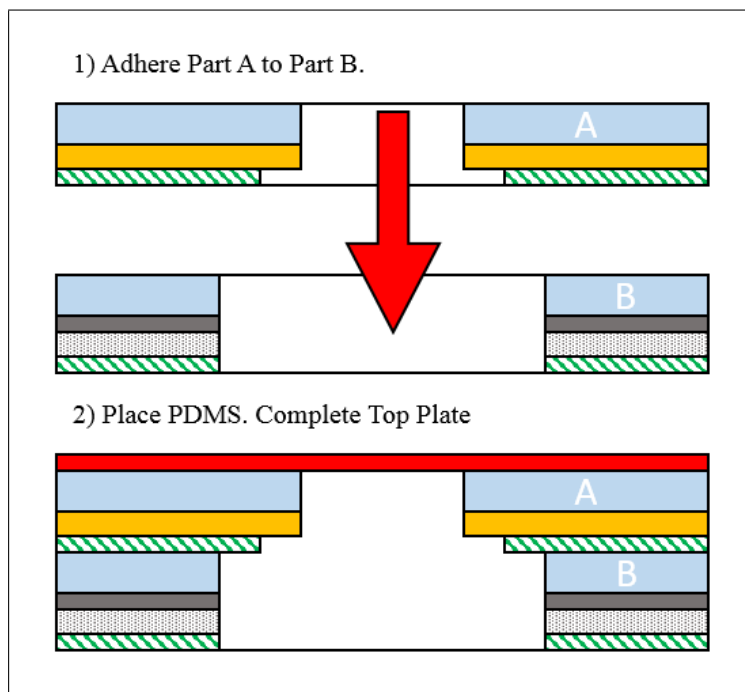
Side view of CFAM-DAS top plate part A and part B assembly process.
